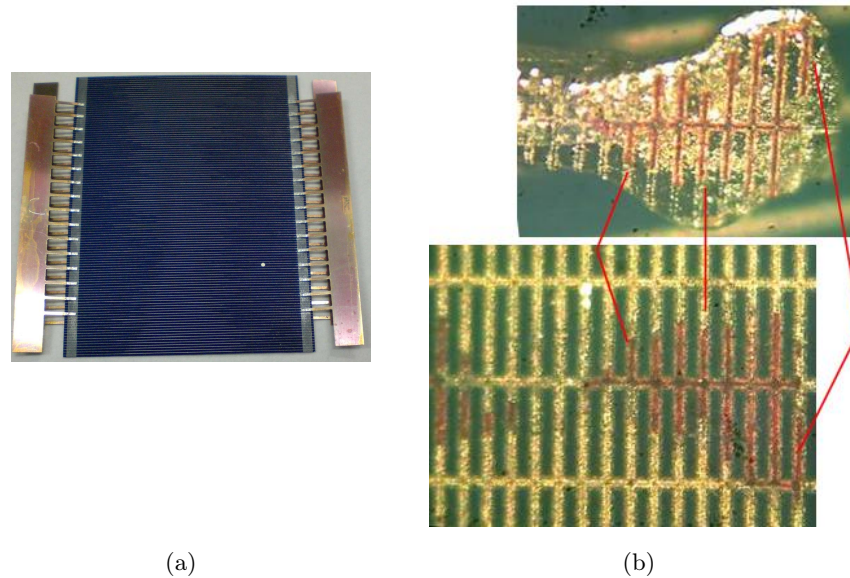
Front Side Solder Contacts - (a) Front side contacts after soldering with pre-coated tab method. (b) Results of solder pull off test under 10x magnification.
